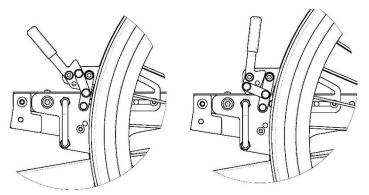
Pull-to-Lock (Left) and Push-to-Lock(Right) Wheel Locks (standard)
